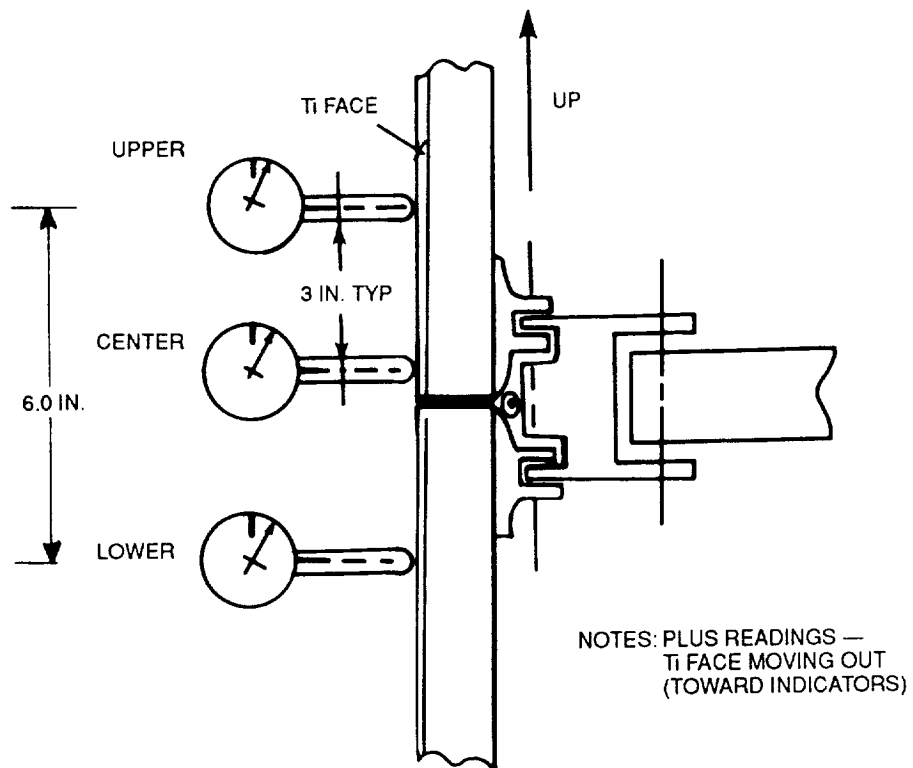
COMPRESSION TEST — J3 LARGE SLIDING JOINT
